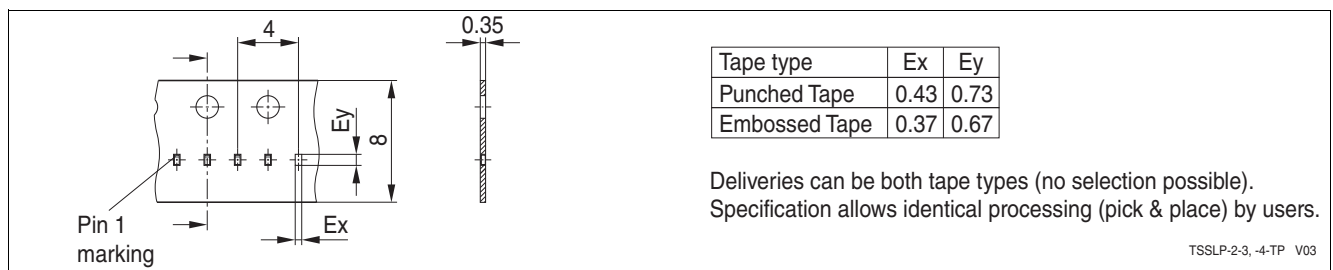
TSSLP-2-4 Packing (dimension in mm)
